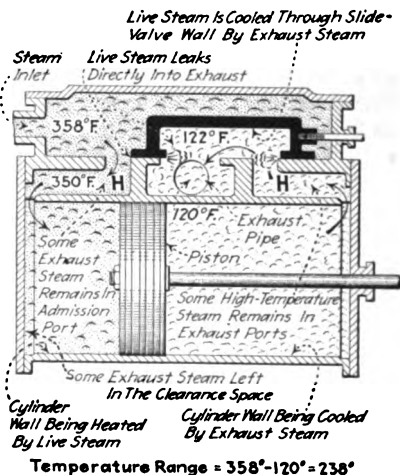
Showing live steam and exhaust steam in contact with parts of a single-valve engine. (The engine is assumed to operate condensing at 150 lb. per sq. in. and 26.5 in. of mercury vacuum.)
